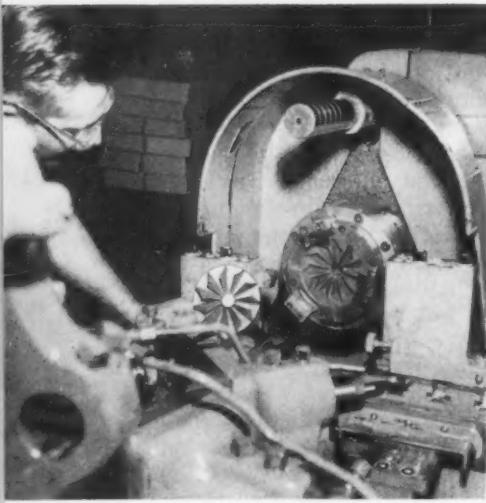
Special cast Devcon F fixture in chuck of lathe designed to receive vane impeller. Besides providing rigid holding surface, fixture dampens machining noise.
